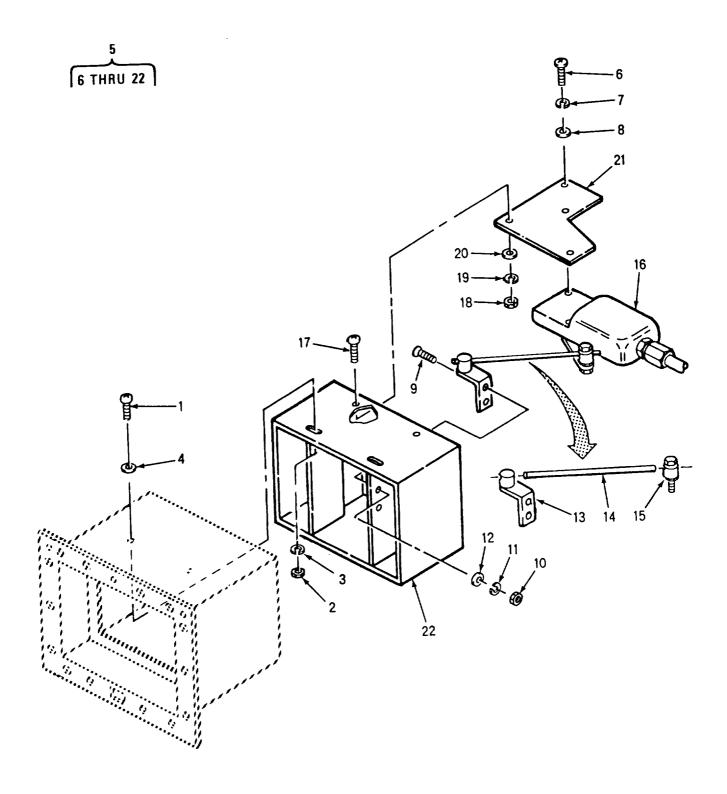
Purge Port Damper Motors (Sheet 1 of 2)
